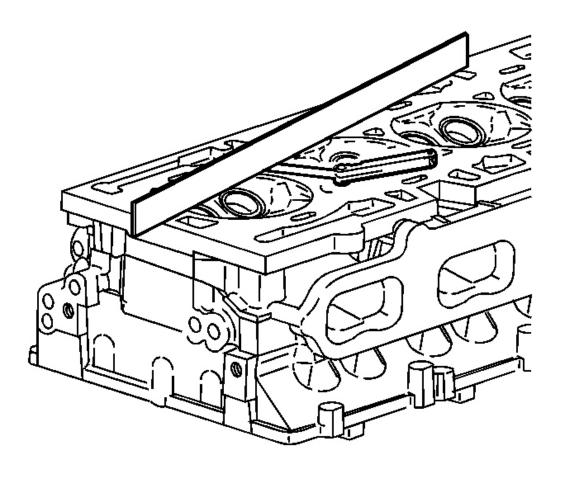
Checking For Cylinder Head Warpage Courtesy of GENERAL MOTORS CORP.
